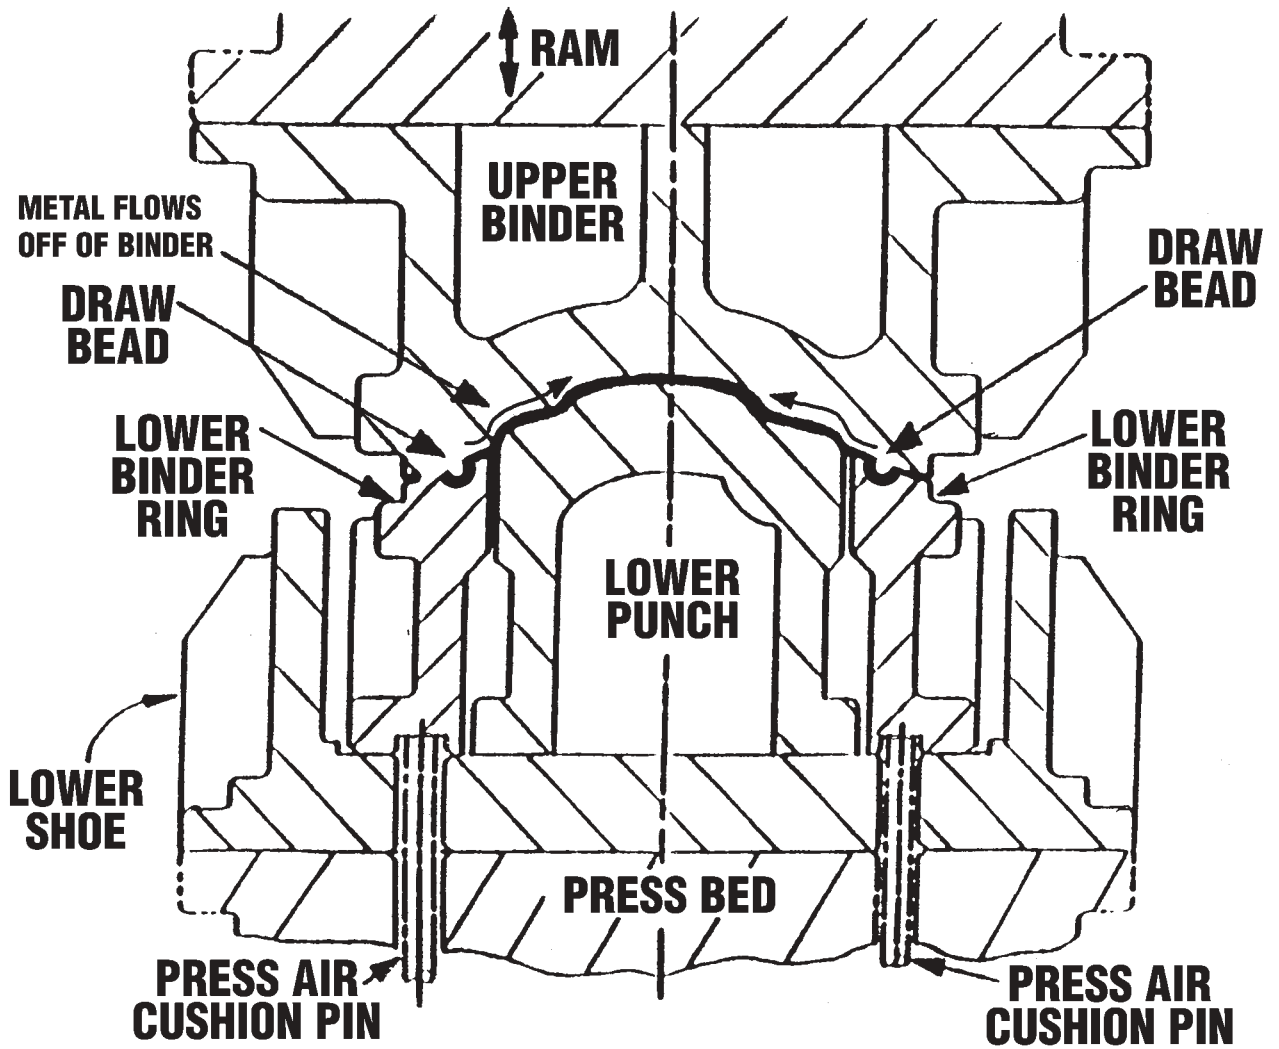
Draw-Die Single Action Press (Lower Binder)
